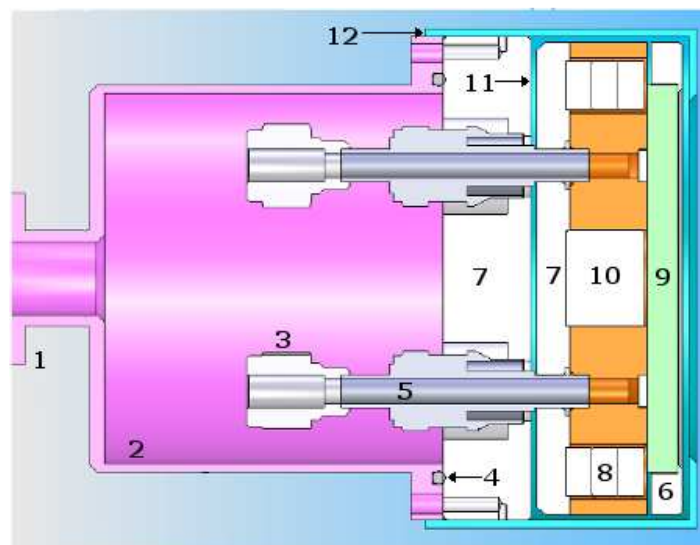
Sputter gun cross-section. Key: 1 (3.38 cm CF flange); 2 (Vacuum Housing); 3 (0.64 cm Swagelok fitting); 4 (Viton O-ring); 5 (Water/Electrical feedthrough); 6 (Target clamp); 7 (Brazed assembly); 8 (Magnets); 9 (Target); 10 (Iron Slug); 11 (Gap); 12 (Anode/ Sputter shield).
